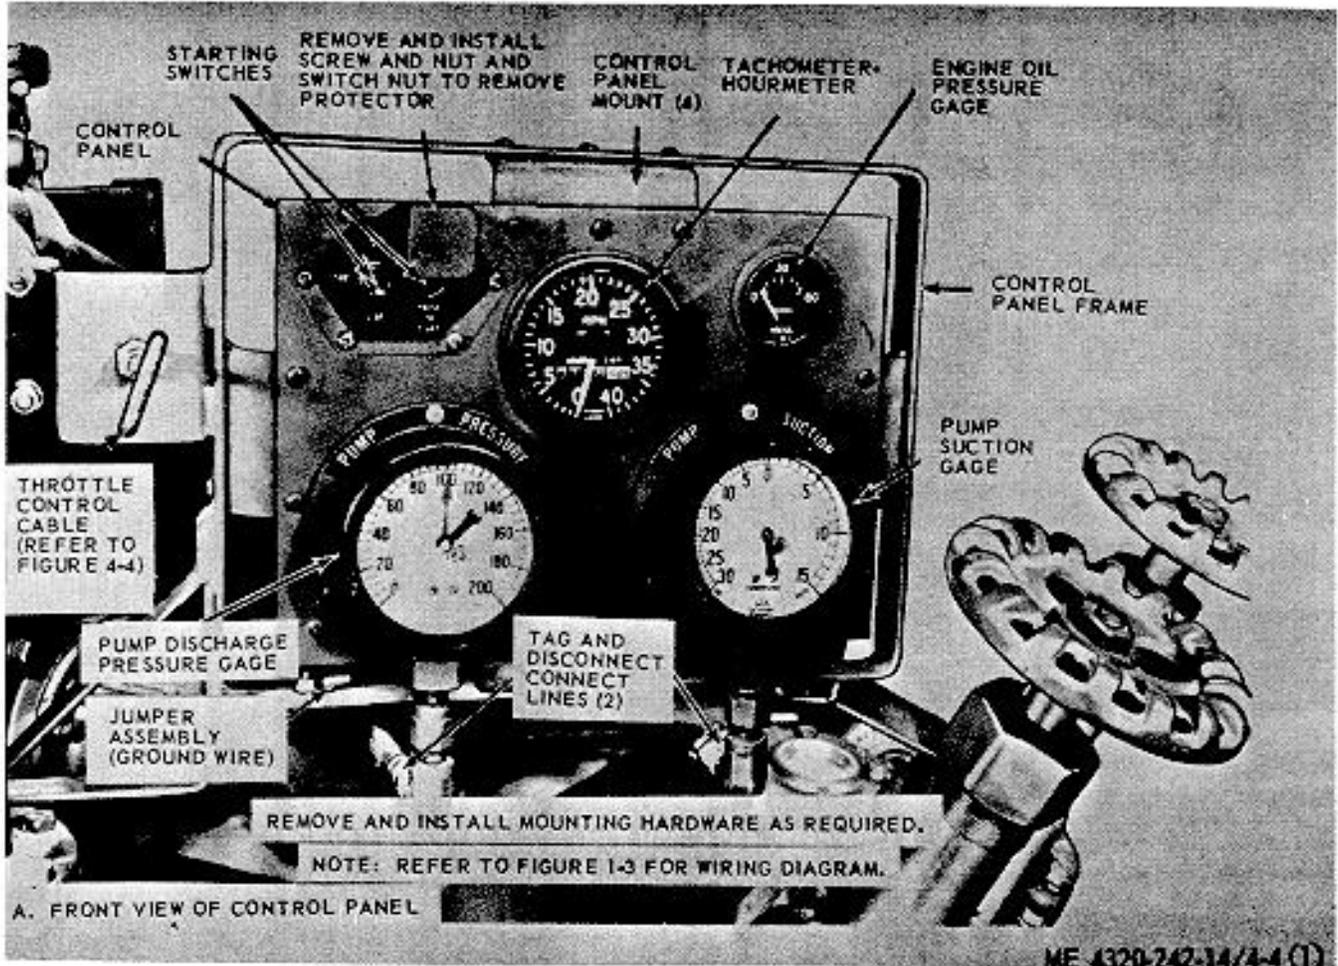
Gages and panel, removal and installation. (Sheet 1 of 2).
